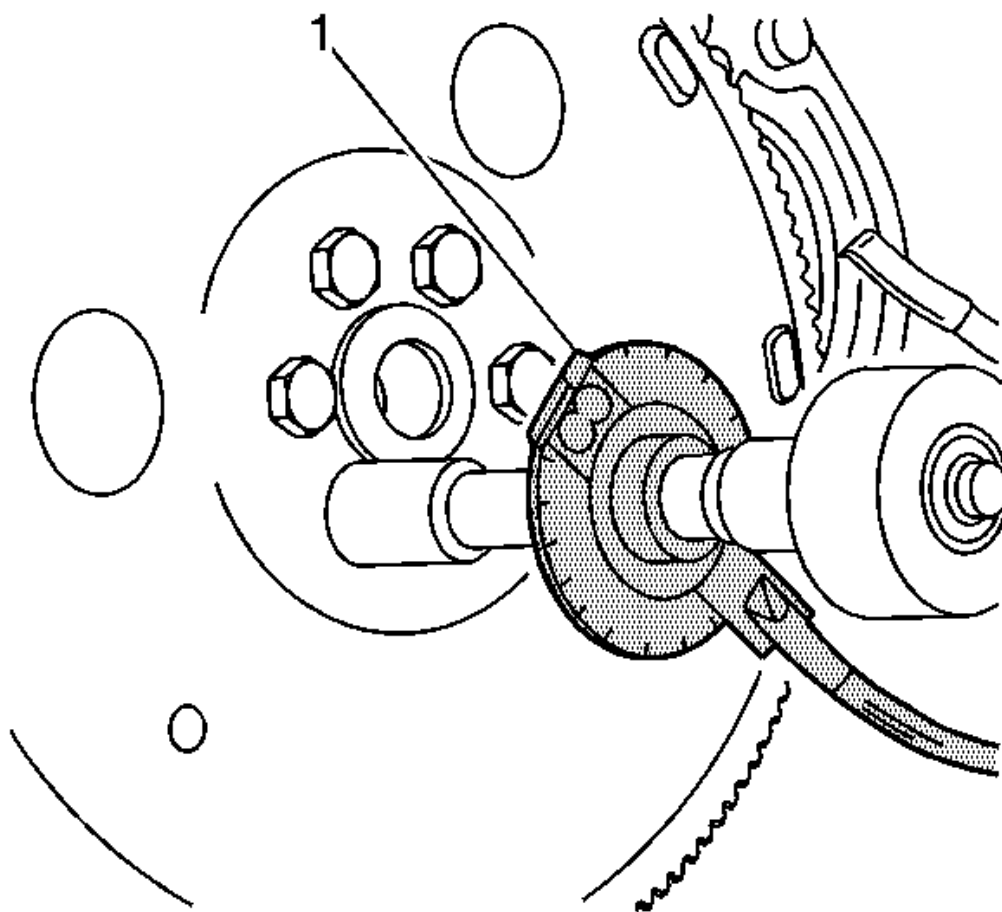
View Of Torque Wrench Special Tool And Flexplate
